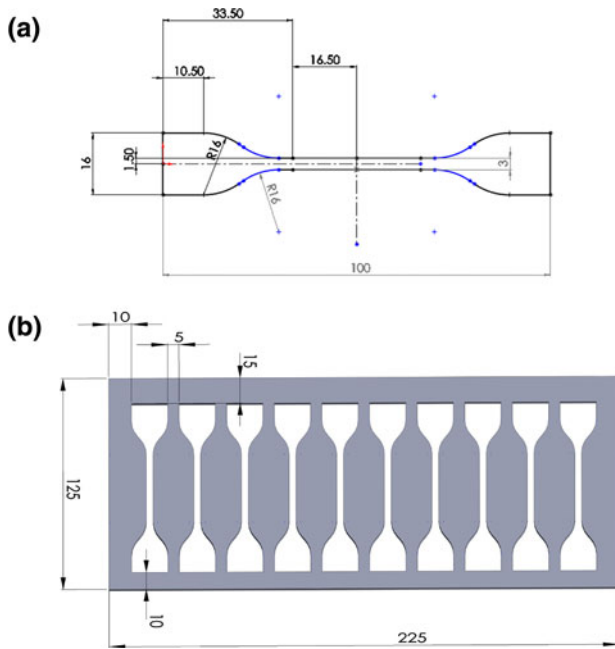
(a) Dimensions of the tensile sample (in mm) and (b) 2-mm-thick steel plate for the molding of the adhesive.
